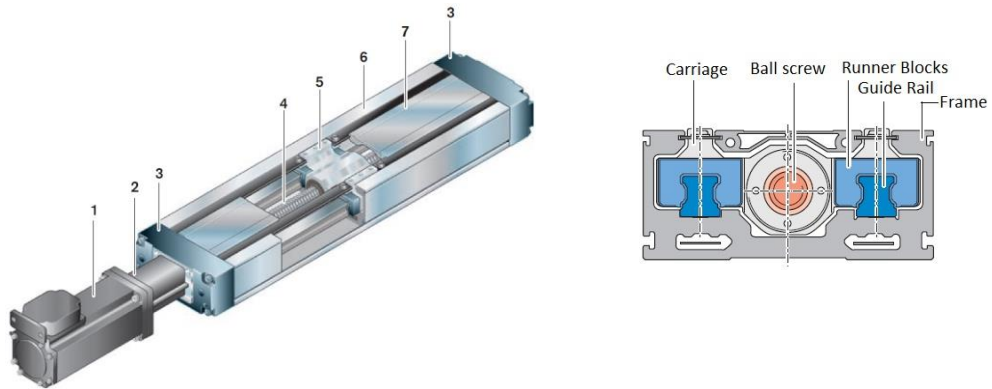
Linear motion system; 1: servomotor, 2: flange & coupling, 3: end blocks with bearings, 4: ball – screw drive, 5: carriage with runner blocks, 6: loading profile as frame with guide – rail, 7: cover plate (Bosch Rexroth AG, 2007).
